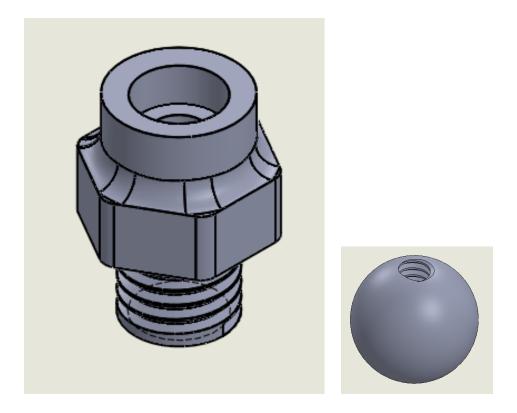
Safety Valve Body and Valve Ball (Isometric)
